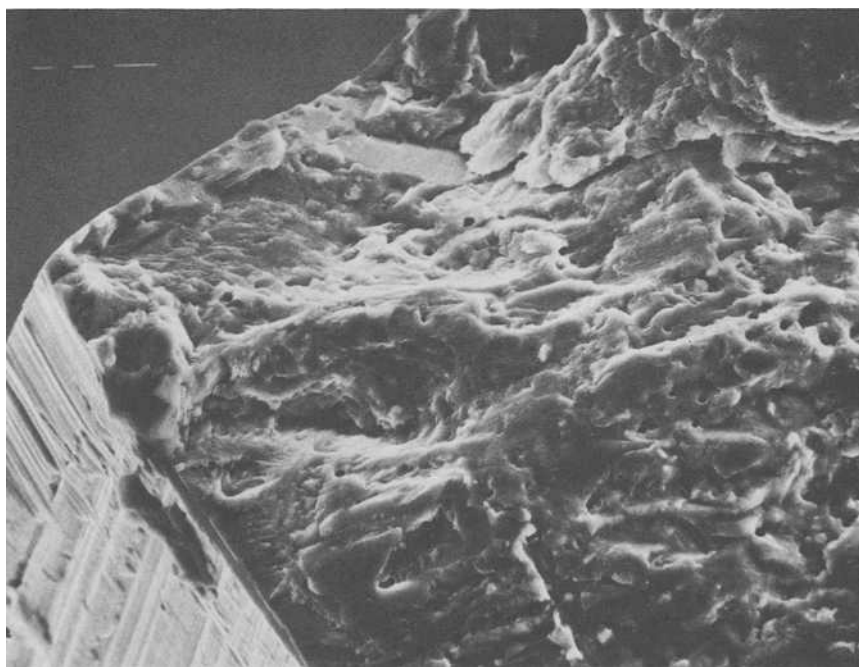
View of fracture surface; Specimen N29; SEM at $\times 500$.
